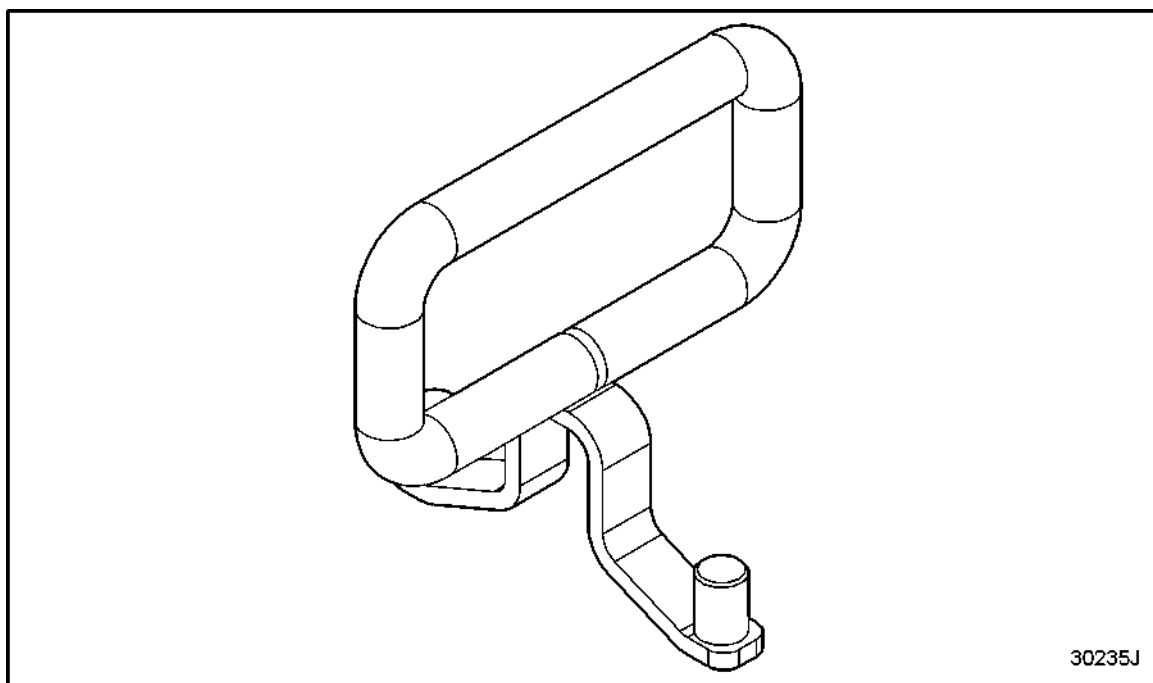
Piston & Rod Lifting Tool,J 42781
